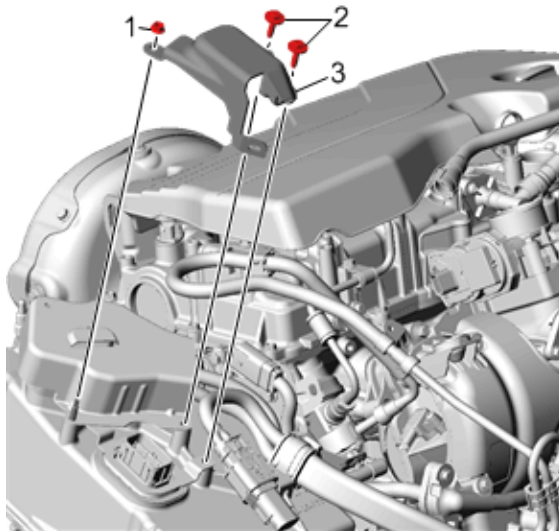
T6 Power Inverter Module X1 56-Way Connector Cover, Nut And Bolts
